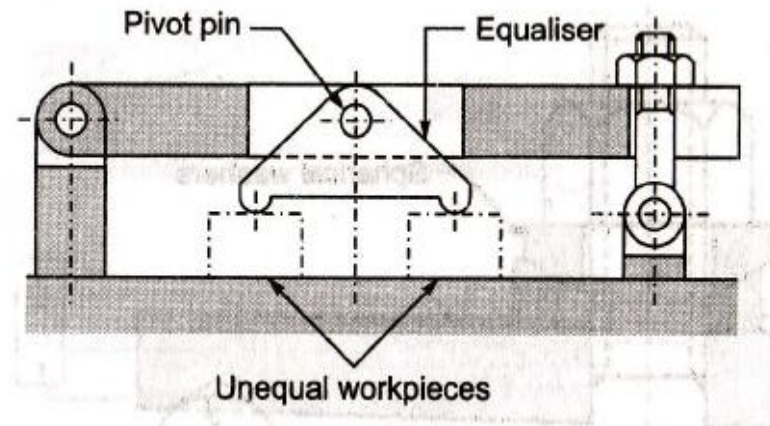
Equalizer for two workpieces (Jigs and Fixture, P H Joshi, 2001)
